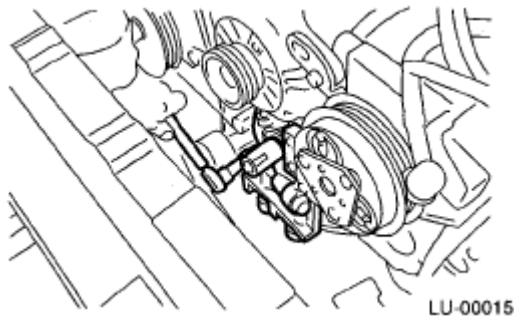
Removing Bolts Which Install Oil Pump Onto Cylinder Block
